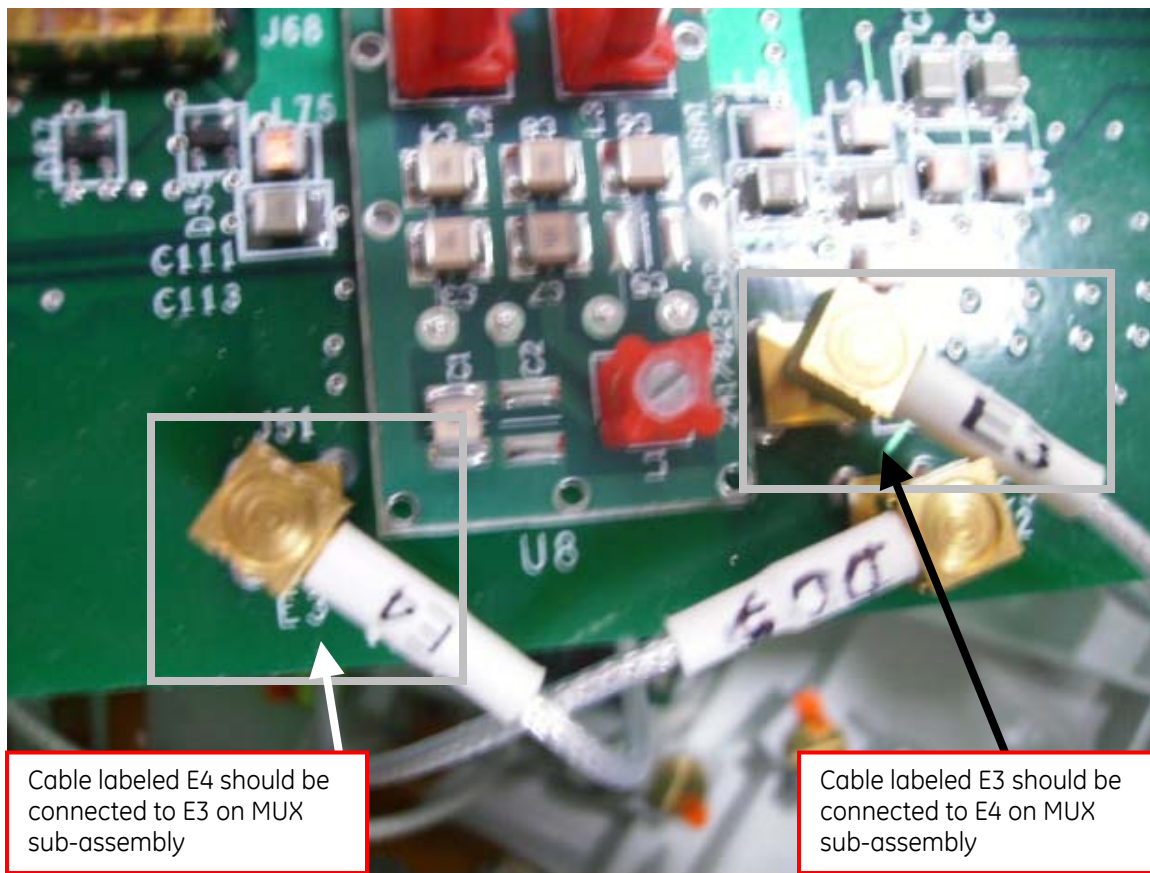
The cable labeled E4 should be connected to E3 on MUX sub-assembly, and the cable labeled E3 should be connected to E4 on MUX sub-assembly
